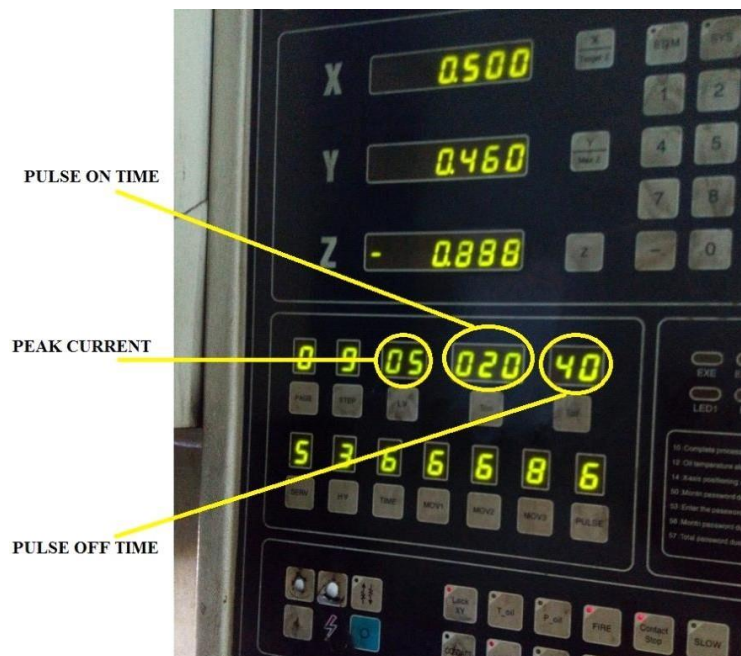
EDM Machine panel showing parameters (Setup for 4th Experiment)
